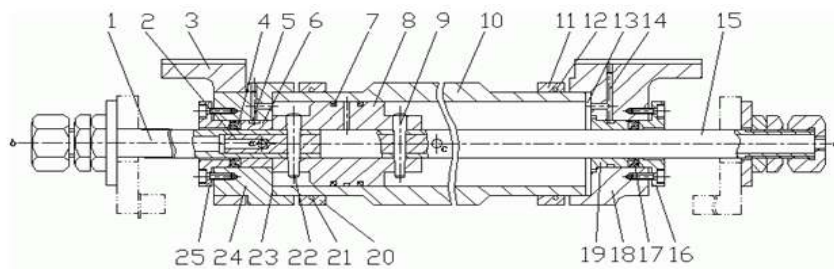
Hollow Piston Hydraulic Cylinder Structure
